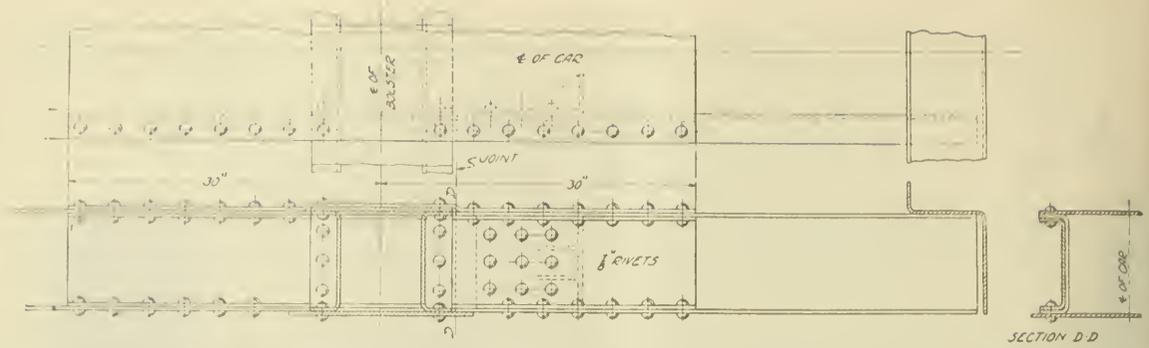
Steel Center Sill Splice (Outside), Less Than 8 Inches From Face of Body Bolster
